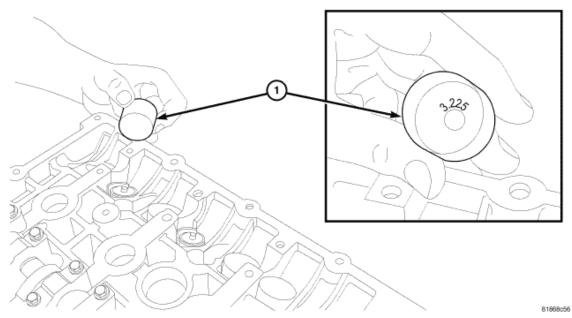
Camshaft Tappet Courtesy of CHRYSLER LLC
